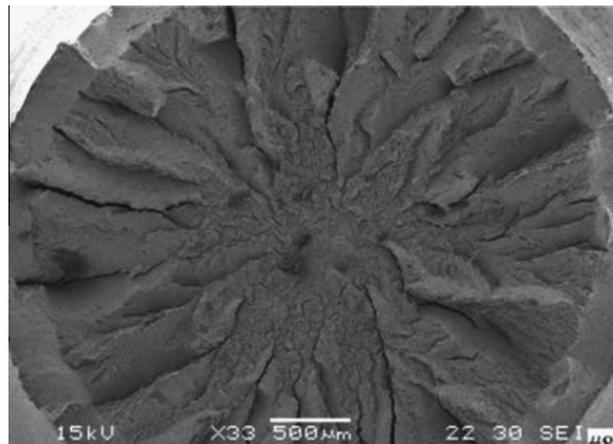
Typical rosette type fracture surfaces in notched embrittled tensile specimens.
